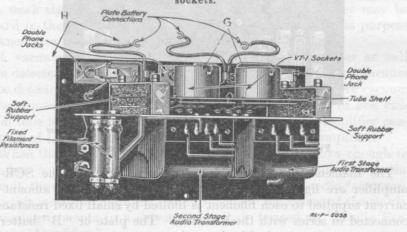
Panel of set box BC-17 removed to show interior parts.
